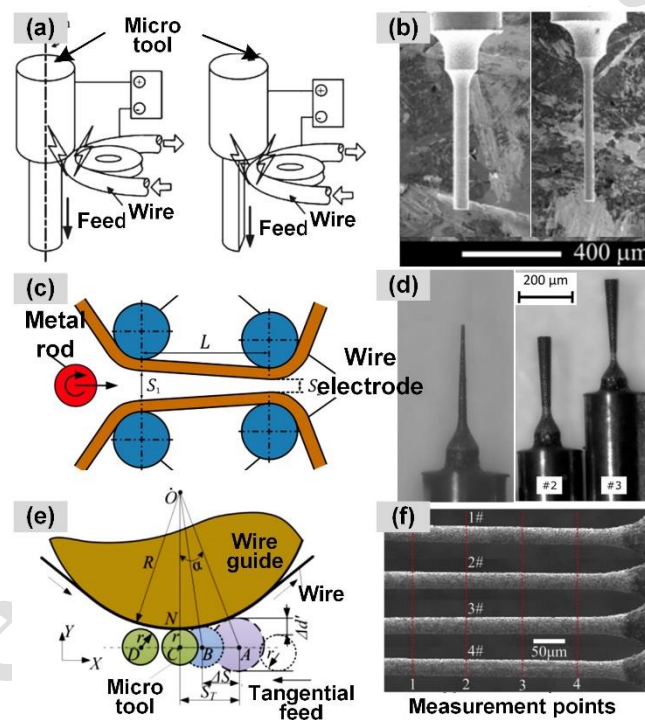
Wire electrical discharge grinding (WEDG) technologies and the obtained micro-tools: (a) Fabrication of edge-cutting tool by WEDG, and (b) Machined tools with cross-sections of circle and semicircle (Yang et al., 2009); (c) Schematic diagram of the twin-wire EDG, and (d) Tapered tools (Bellotti et al., 2021); (e) Schematic diagram of the TF-WEDG, and (f) Cylindrical micro-tools (Zhang et al., 2015a).
